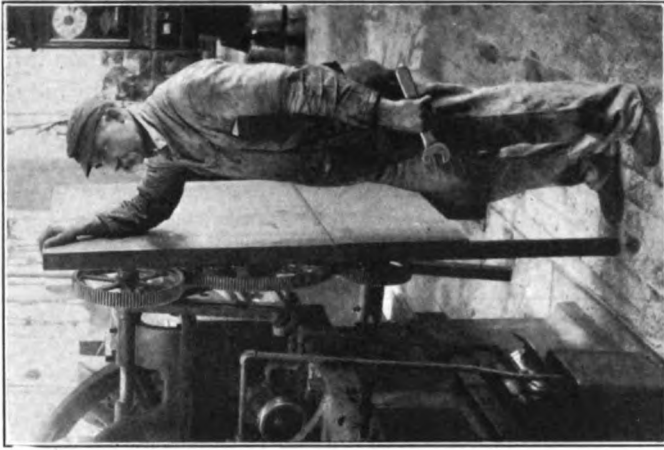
MILLING MACHINE WITH GEARS INSIDE THE FRAME
